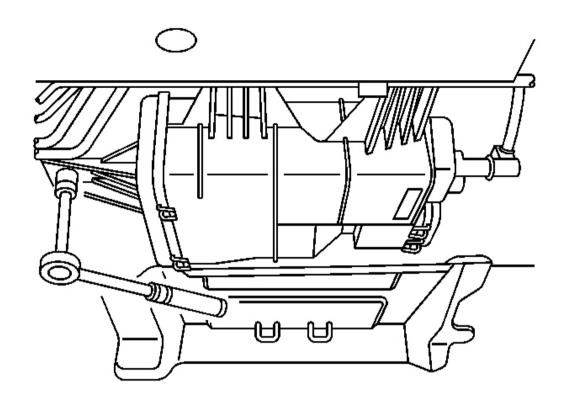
View Of Evaporative Emission (EVAP) Canister Vent Solenoid Valve Courtesy of GENERAL MOTORS CORP.
